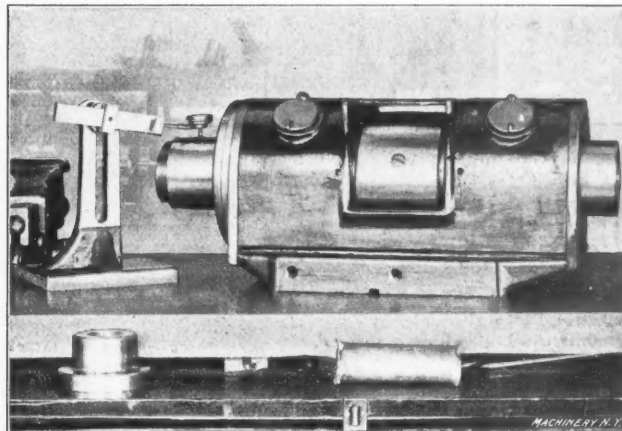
Testing Wheel Spindle for Parallelism with Base
